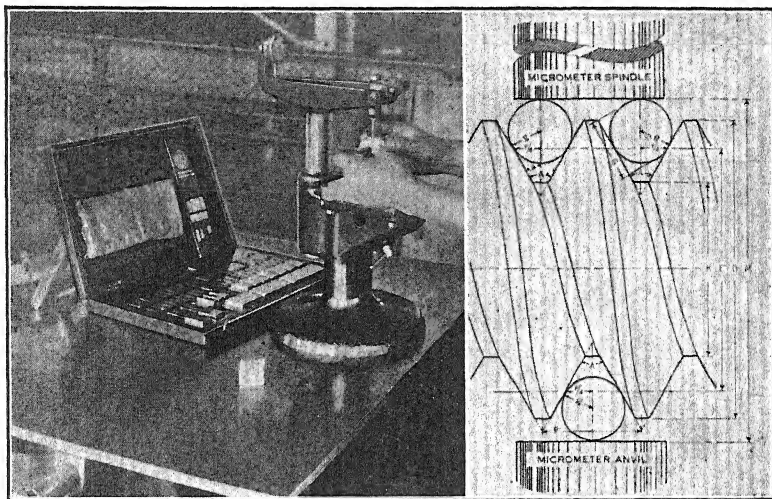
An "American" Dial Indicator Amplifying Gage Used for Checking the Pitch Diameter of a Screw-Thread Gage by the Three-Wire Method.
